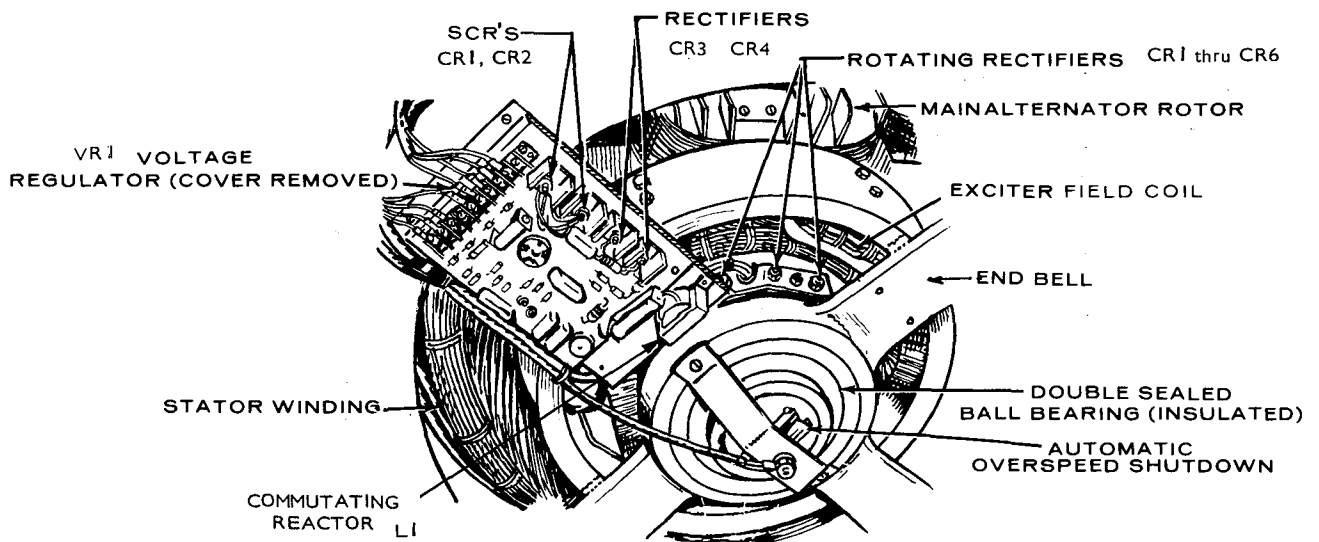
GENERATOR END VIEW (FRONT GRILLE REMOVED)
